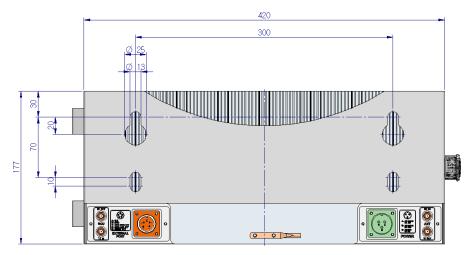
VHF/UHF AOR Wall Mount Dimensions
